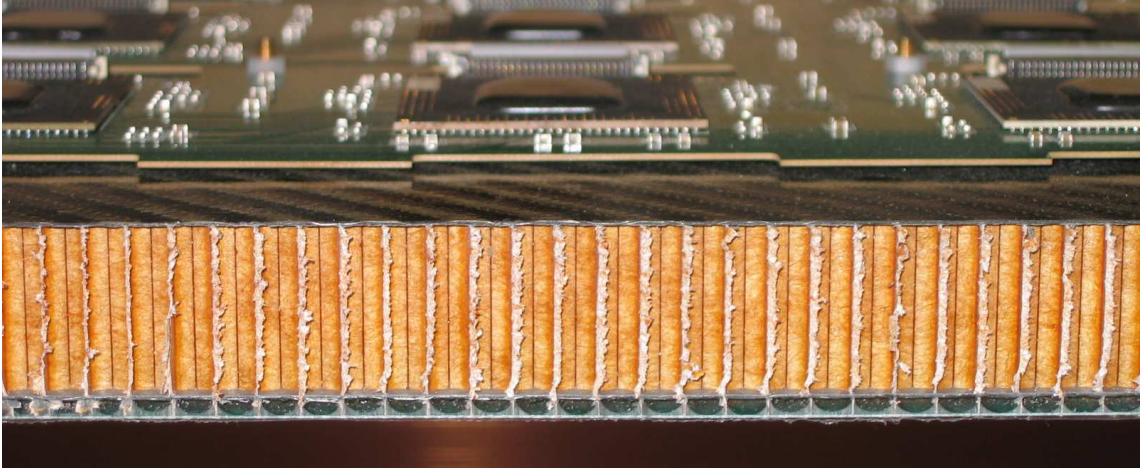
Photo of the back panel composite structure cross section. Well visible in the bottom part are the glue joints between the pad plane and the 2 mm thick honeycomb spacer.
